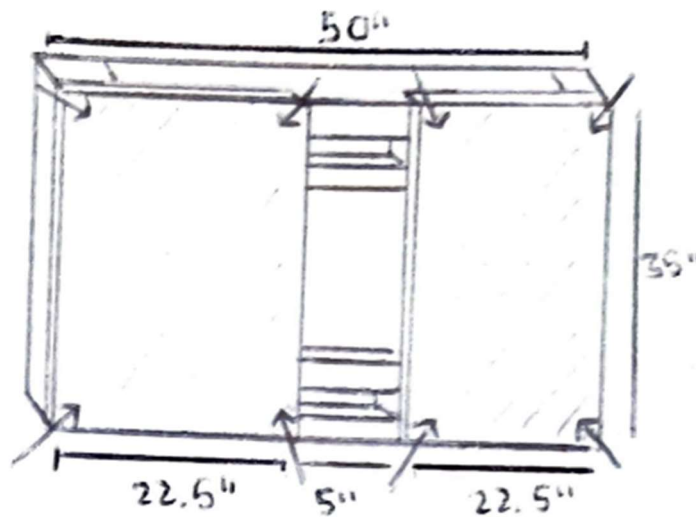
Alignment and drilling of holes of cardboard and base frame.
